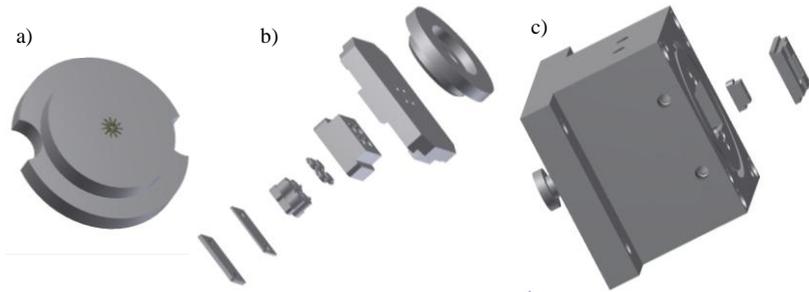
a) Design of the UV-LIGA mold insert; b) and c) Tooling concept for use in a Microsystem50 micro injection molding machine
